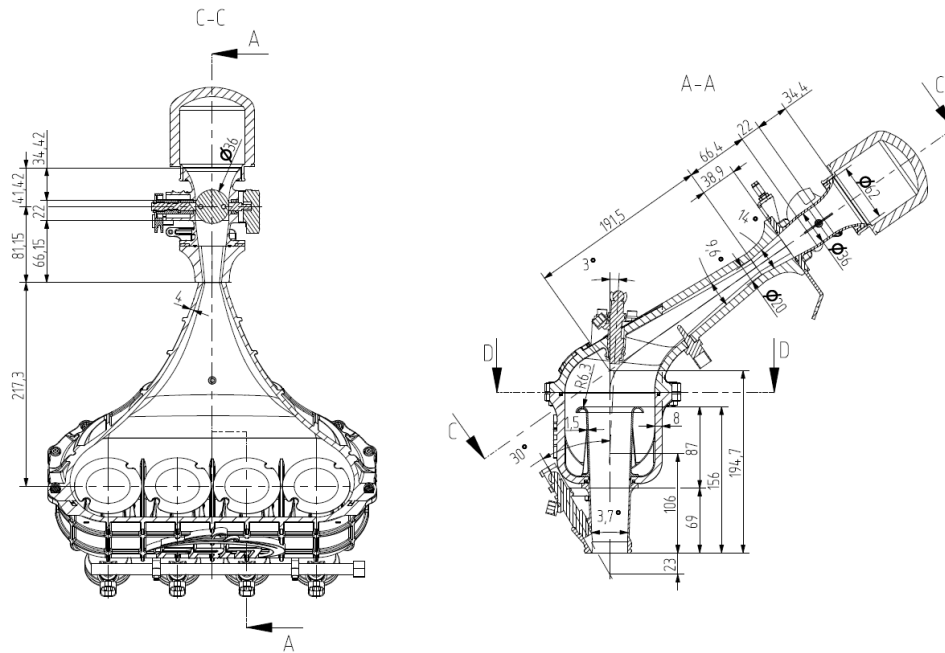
Honda CBR 600RR (PC 37) current intake manifold dimensions.
